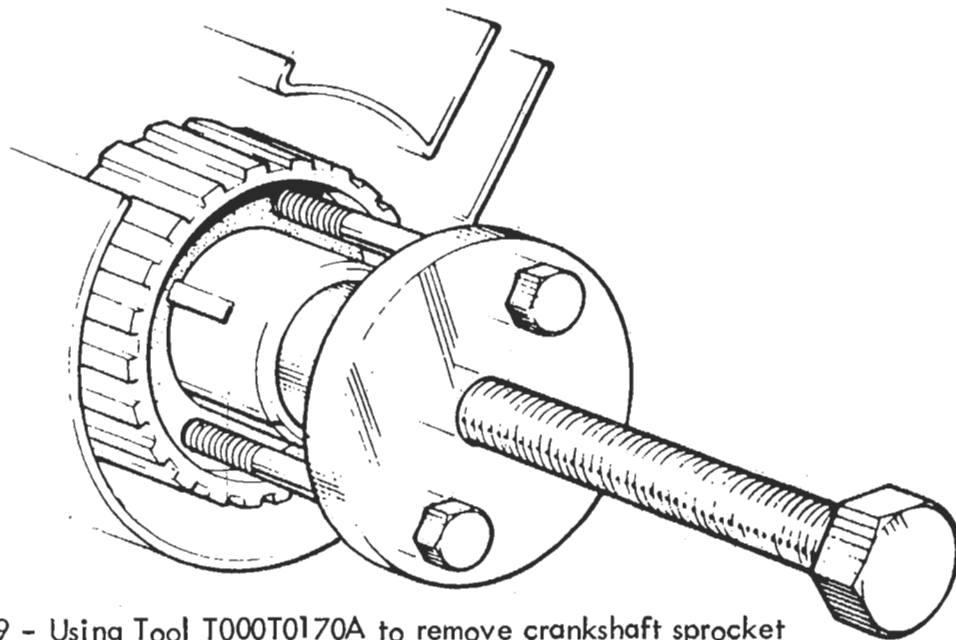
Using Tool T000T0170A to remove crankshaft sprocket
